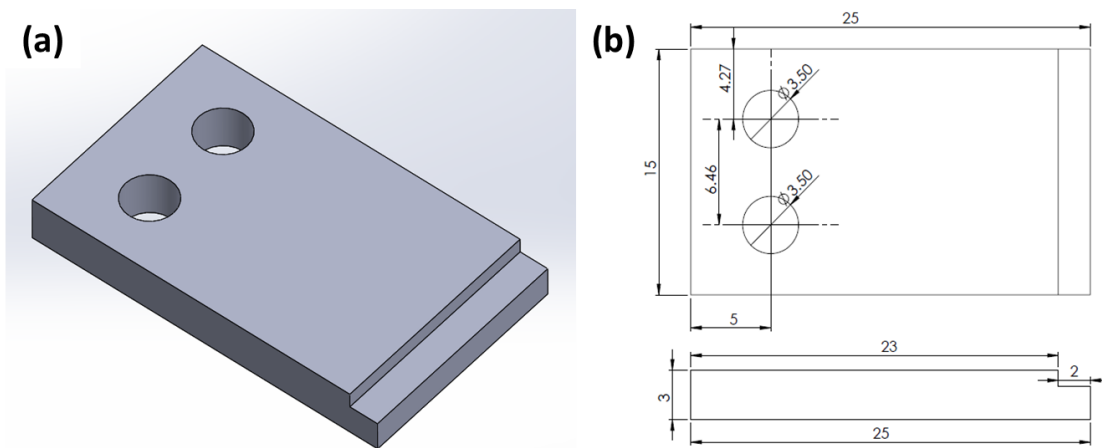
(a) Model of sample test plates for laser-machined samples used in ex situ load frame and (b) drawing of test plates with dimensions labeled in mm.
